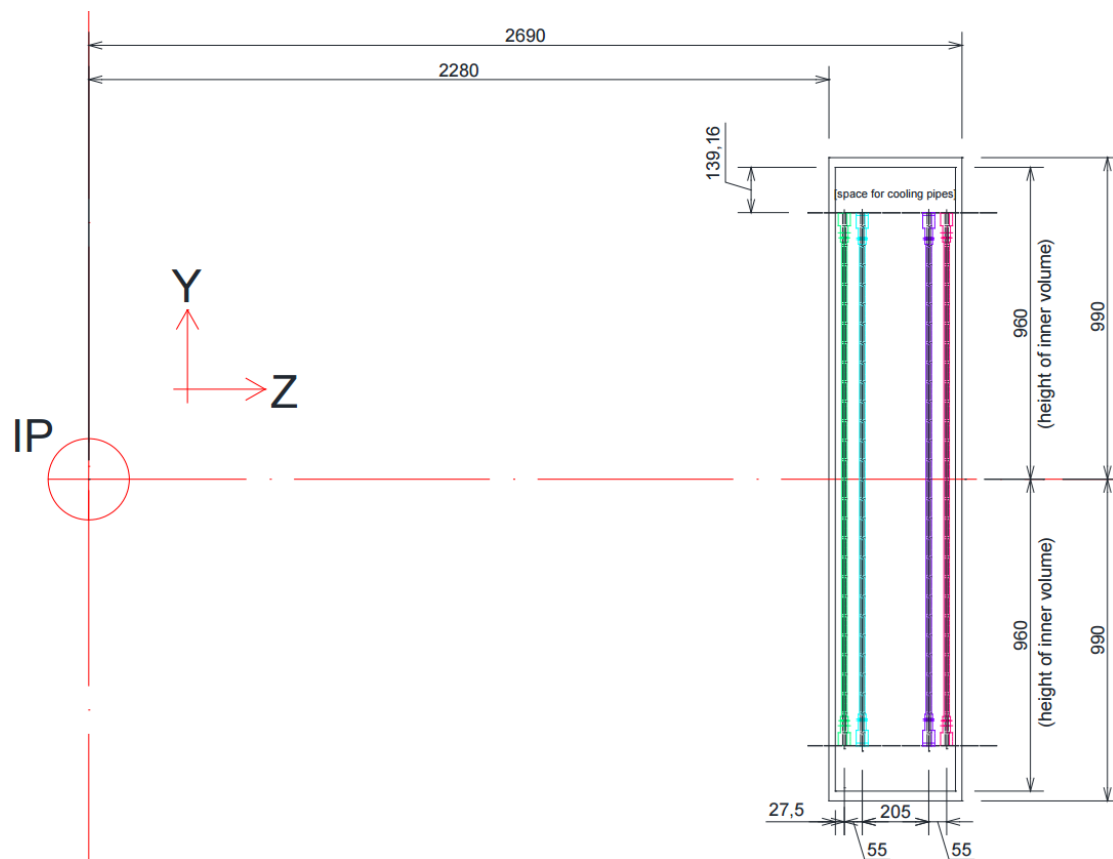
Side view of the UT-box, dimensions in [mm], [8].
